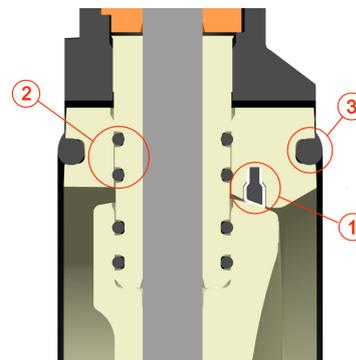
Innovative gasket concept consisting of 1. Flange gasket, 2. O-rings on the bearing shell and 3. Conduit gasket
